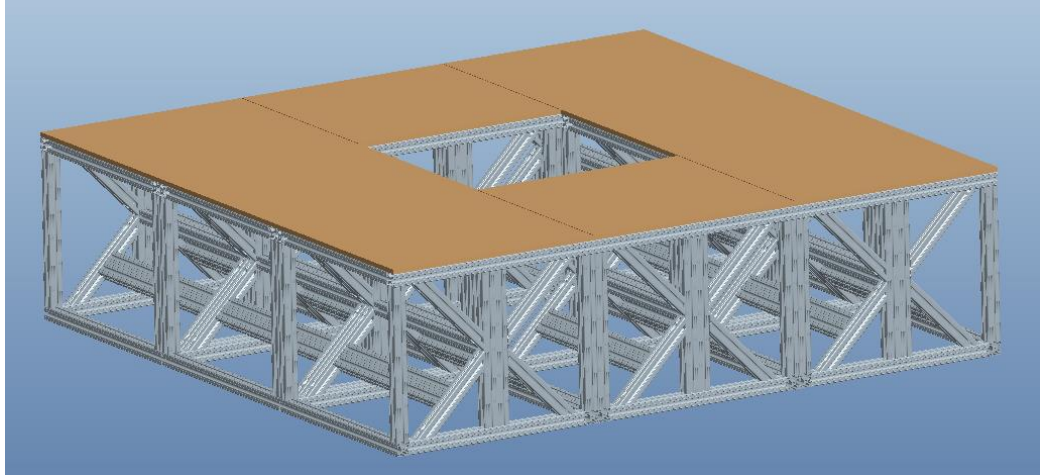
First version of safety platform which utilized a modular design. Each modular component has the same dimensions as the actual balance board.
